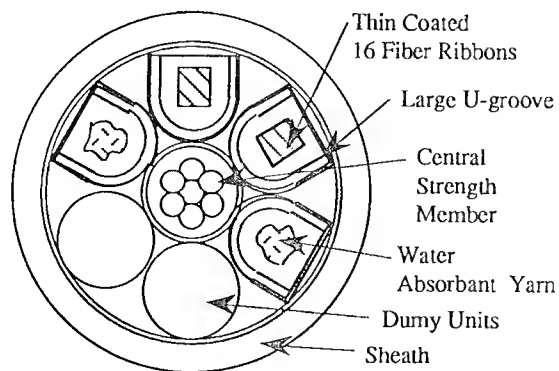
Cross Sectional View of Prototype Large U-Groove Cable
